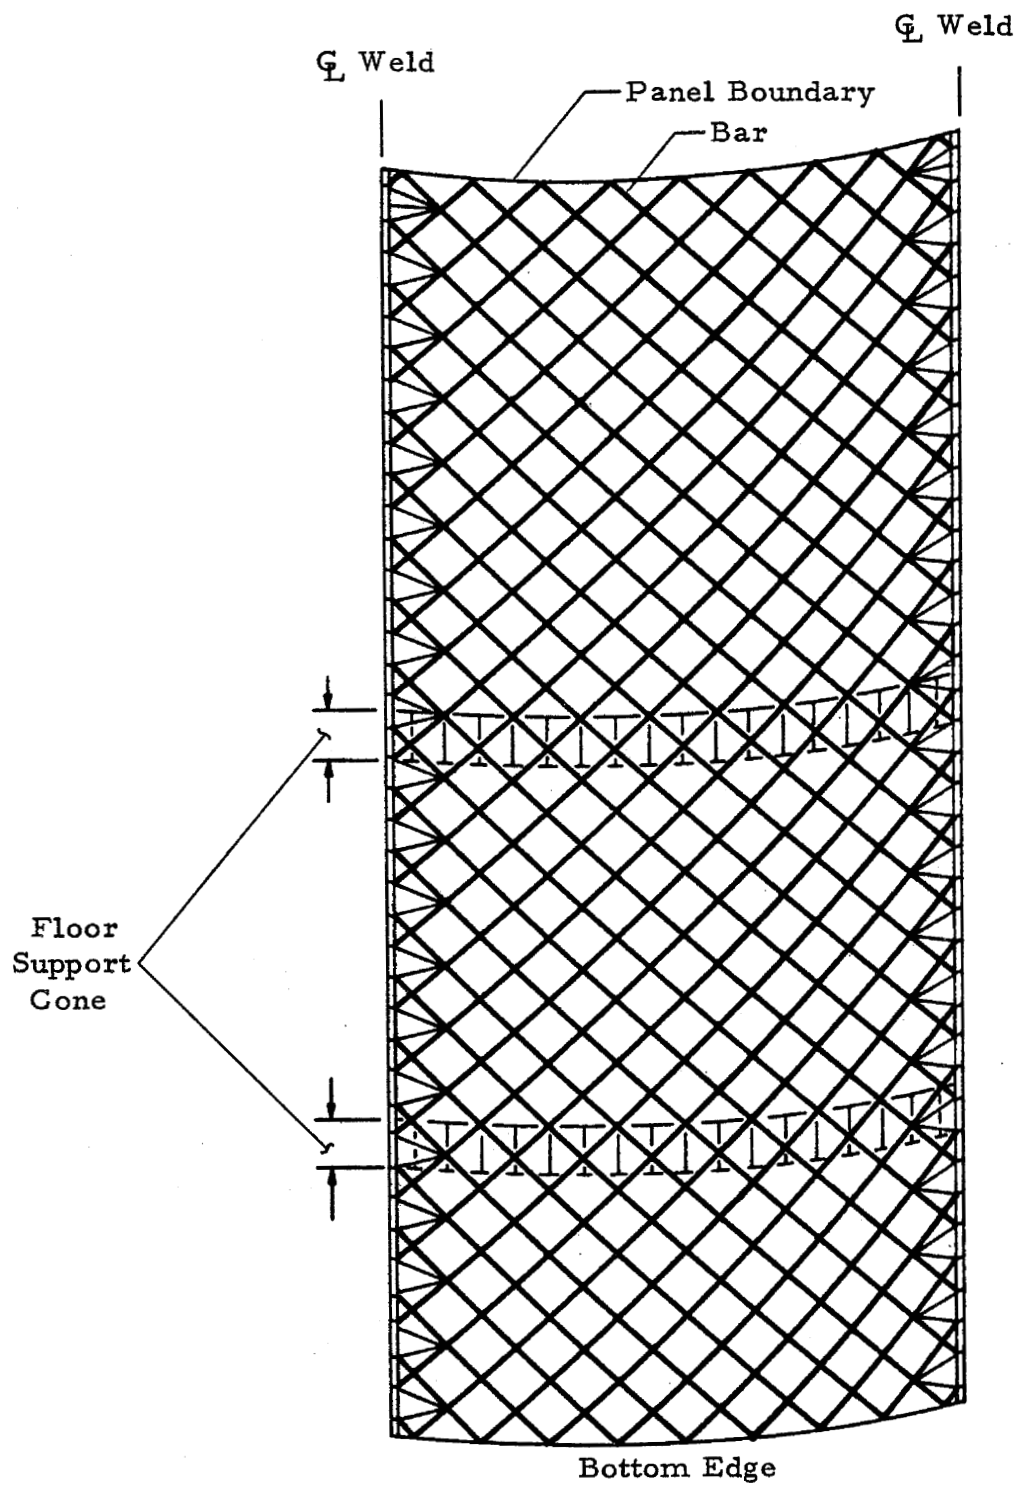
OWS EDGE-WELD MODEL
